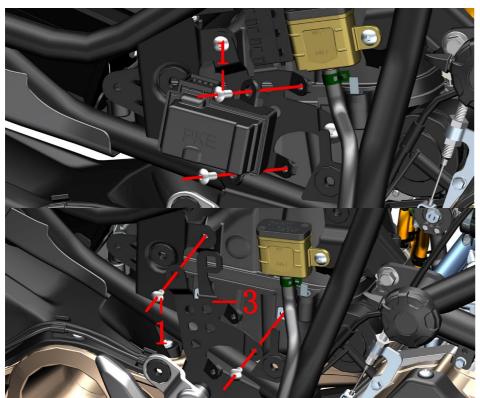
FRAME&ELECTRONIC PARTS COMPONENT		PKE component (Bosch/colloid battery)	CHK
